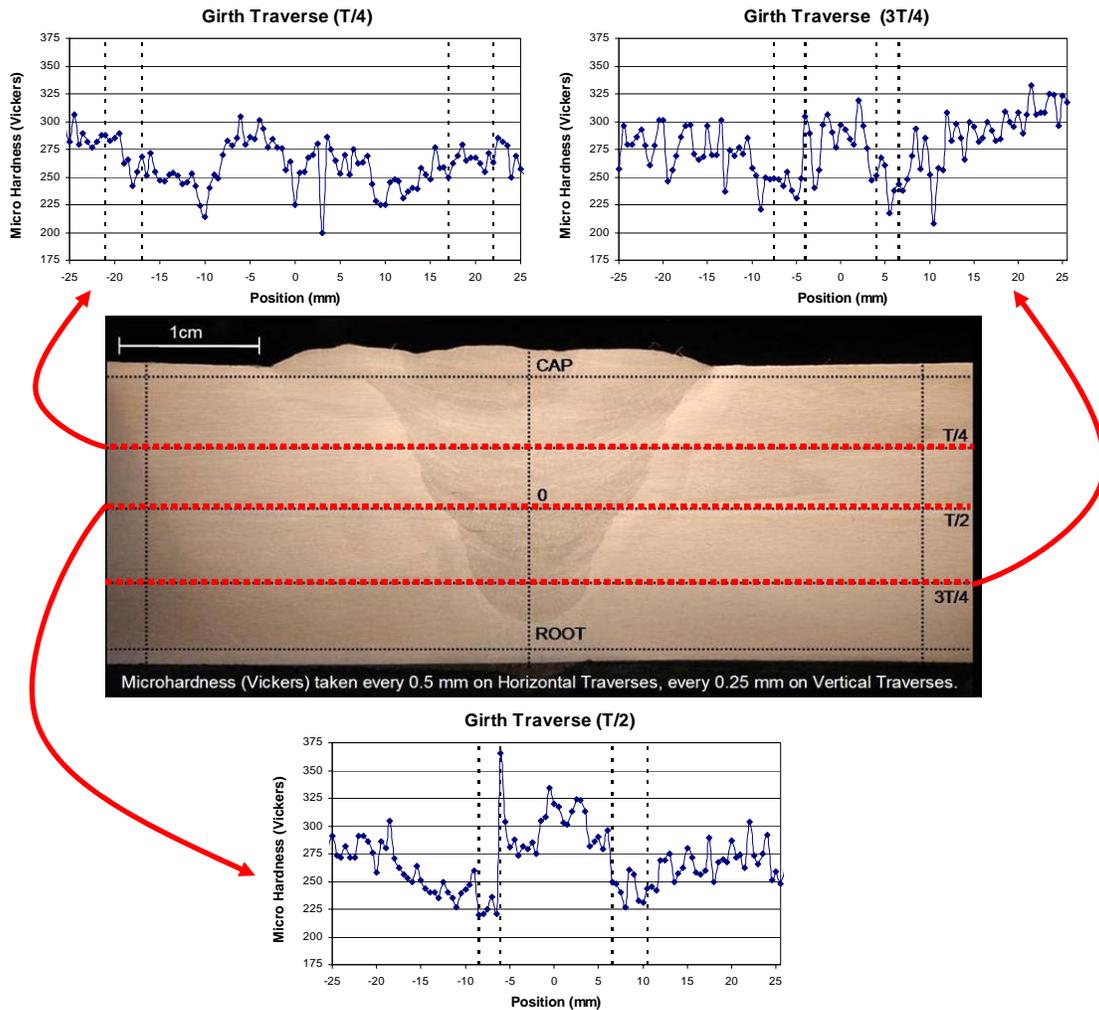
Girth weld section Vickers micro hardness measurements.
